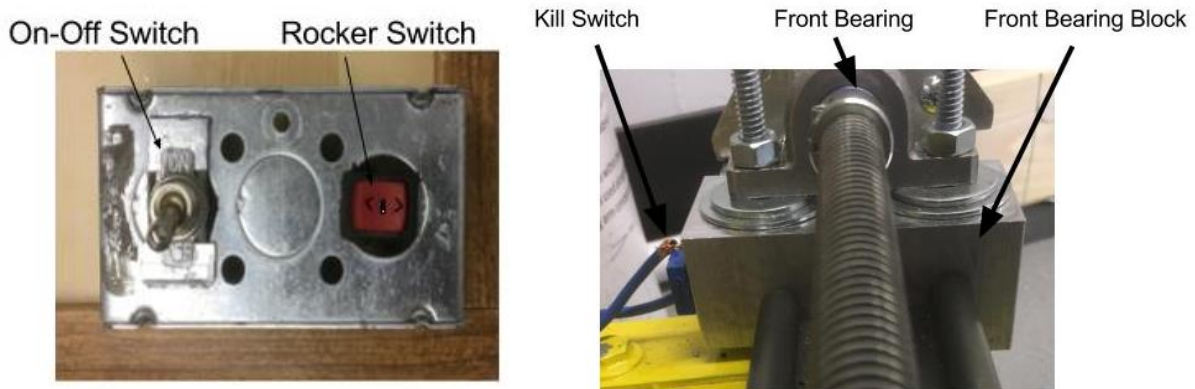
a. Kill Switch on Front Screw Bearing Block (Left) b. Arm Control Panel Mounted to Standing Device Tray (Right)
